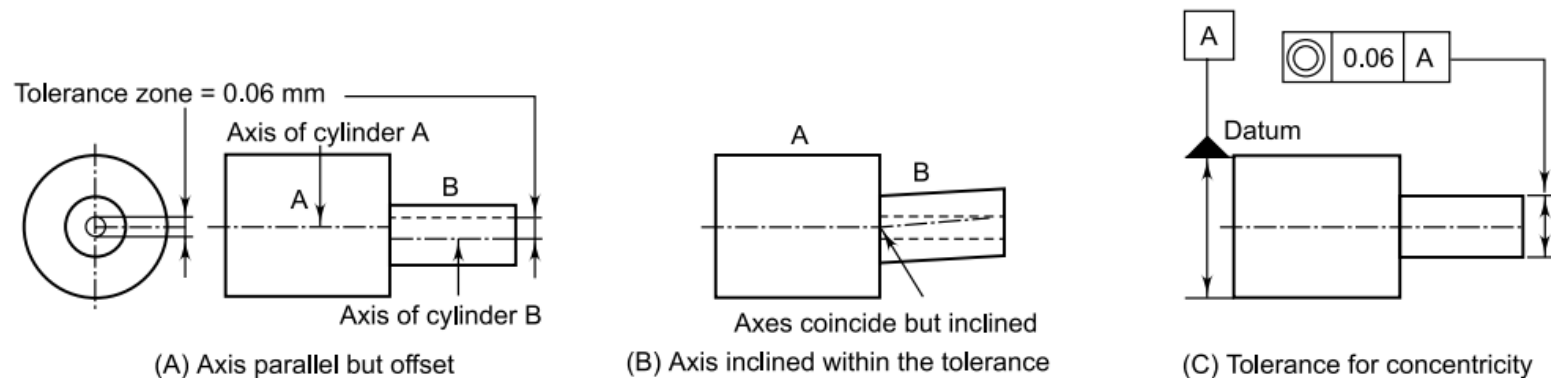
Indicating Tolerance for Concentricity on a Drawing
